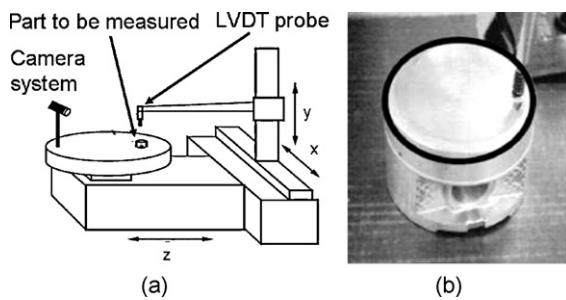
(a) CMM probe and camera, (b) piston [137].
